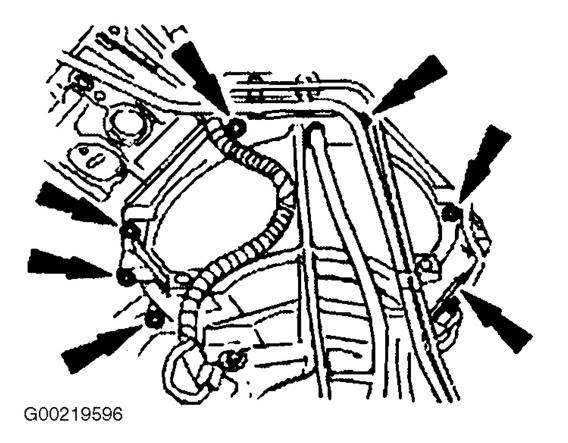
Removing/Installing Front Cross Member Courtesy of FORD MOTOR CO.
